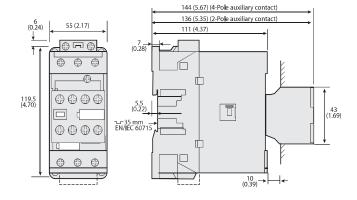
100-E40...100-E65 3-Pole Contactors with Sidemounted Auxiliary Contact
